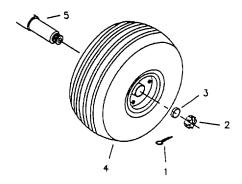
Wheel Assembly, Model 214-706-104-101
